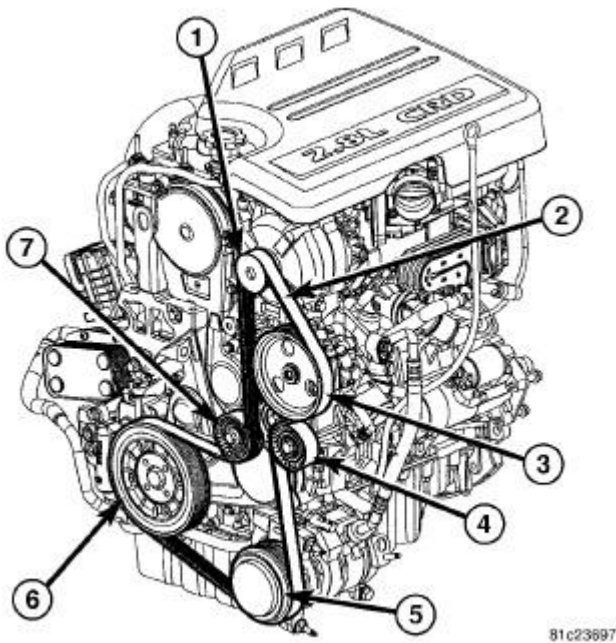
Accessory Drive Belt Routing - 2.8L Diesel
